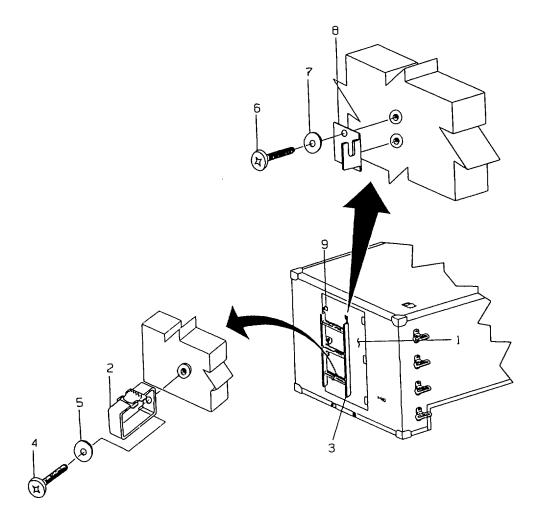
Stowed Ladder Brackets and Strap Assembly.
